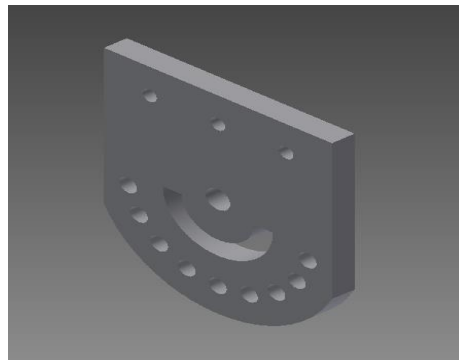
D-plate draft. CAD draft of the D-plate tilt mechanism in the mechanical system.
